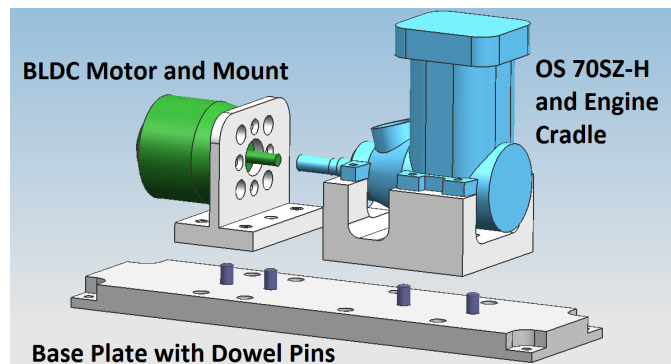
CAD representation of generator structure, shown in exploded view with engine and motor
